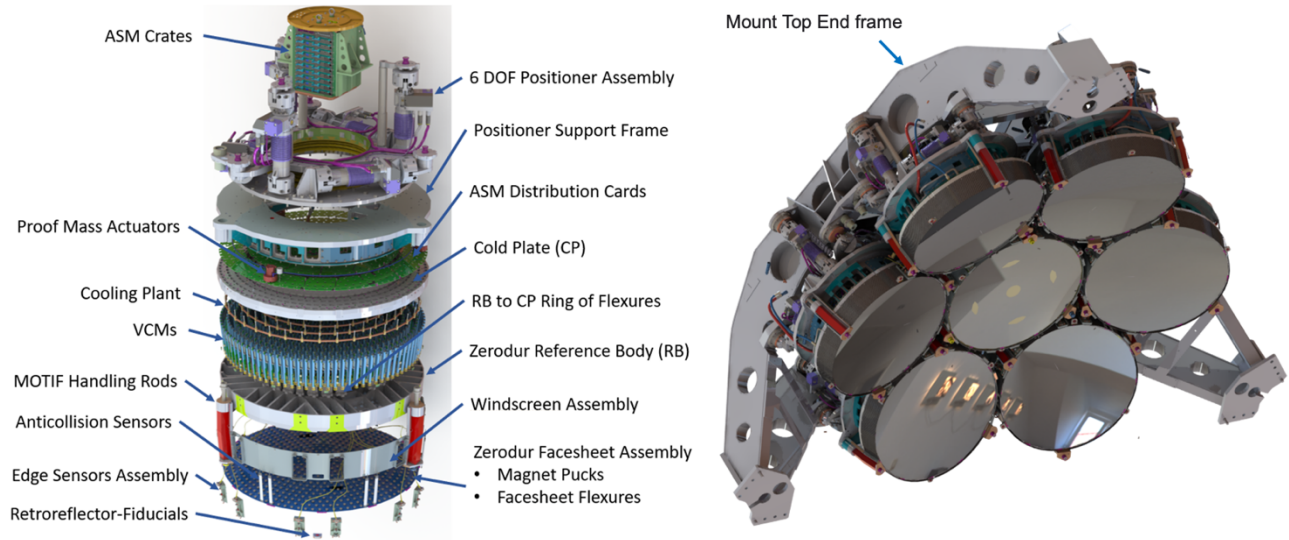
(Left) Exploded view of an ASM segment. (Right) Rendering of the ASM mounted on the Top End frame.
